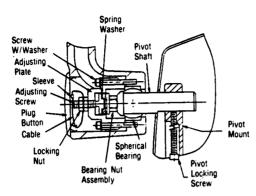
BRAKE SIDE PIVOT SHAFT ASSEMBLY.
